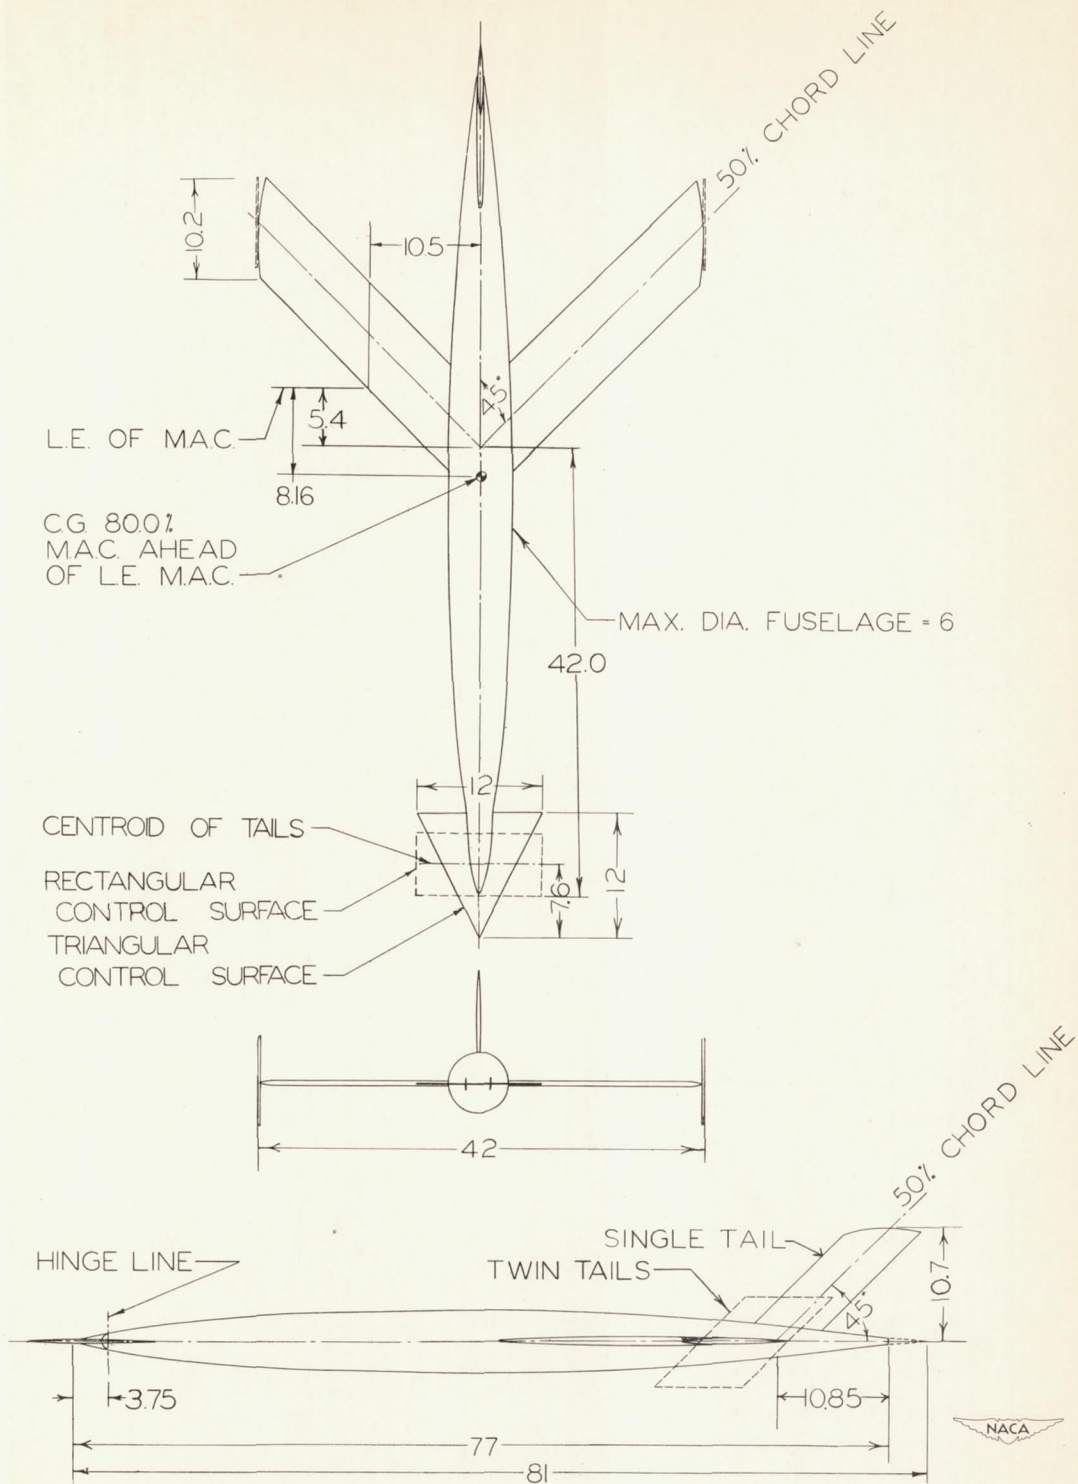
Three-view drawing of model showing the various horizontal control surfaces and vertical-tail configurations. All dimensions are in inches.
